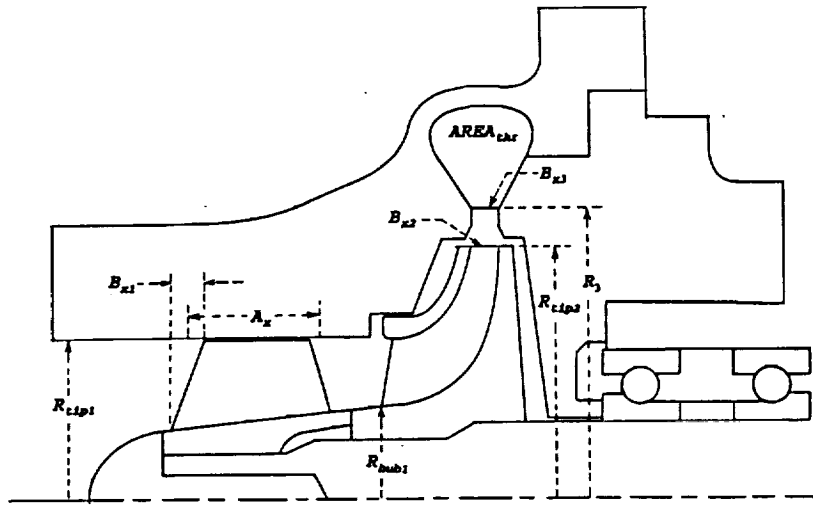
Pump Stage with Axial Inducer and Centrifugal Impeller.
